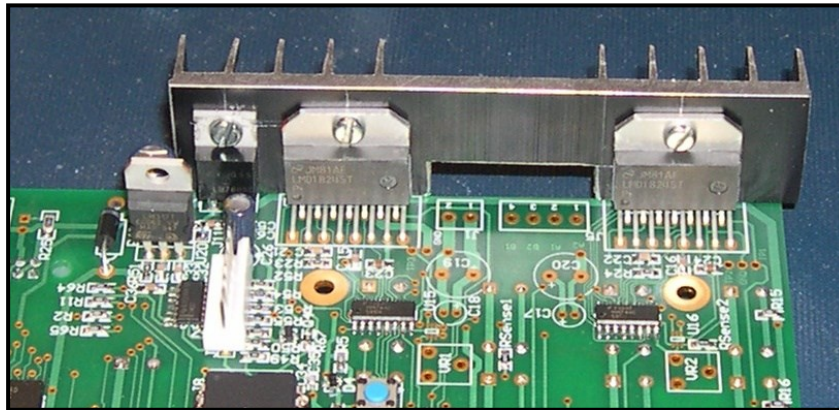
Screw a heatsink to the regulator and two LMD18245's to keep them in line with the PCB while soldering.
